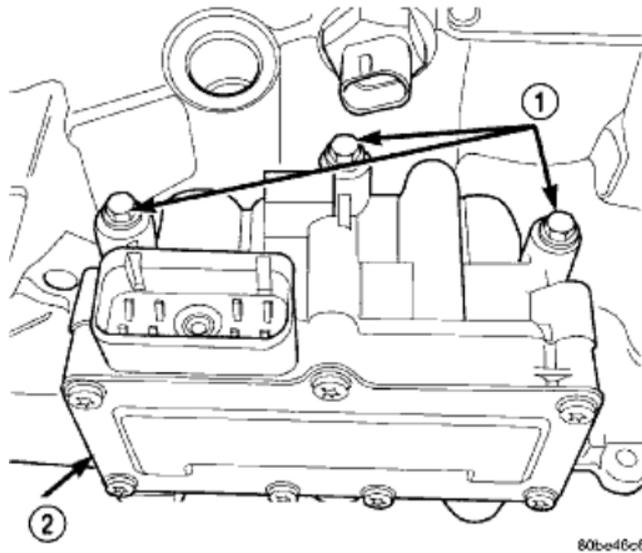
Identifying Solenoid/Pressure Switch Assembly-To-Transaxle Case Bolts
